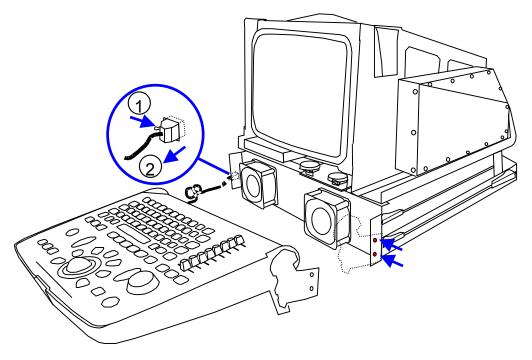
1-6. Screws holding the keyboard and the keyboard connector
